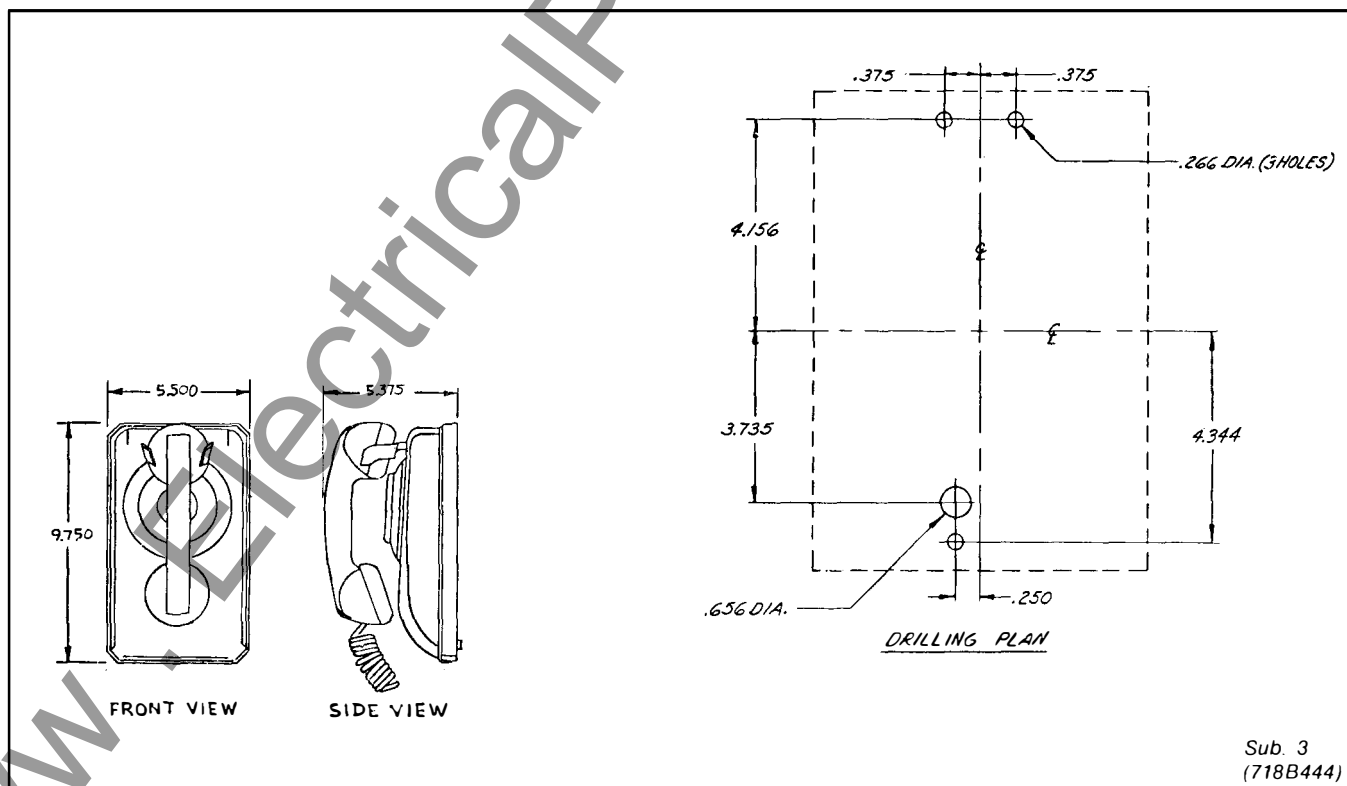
Remote Hookswitch Assembly for Surface Mounting.
